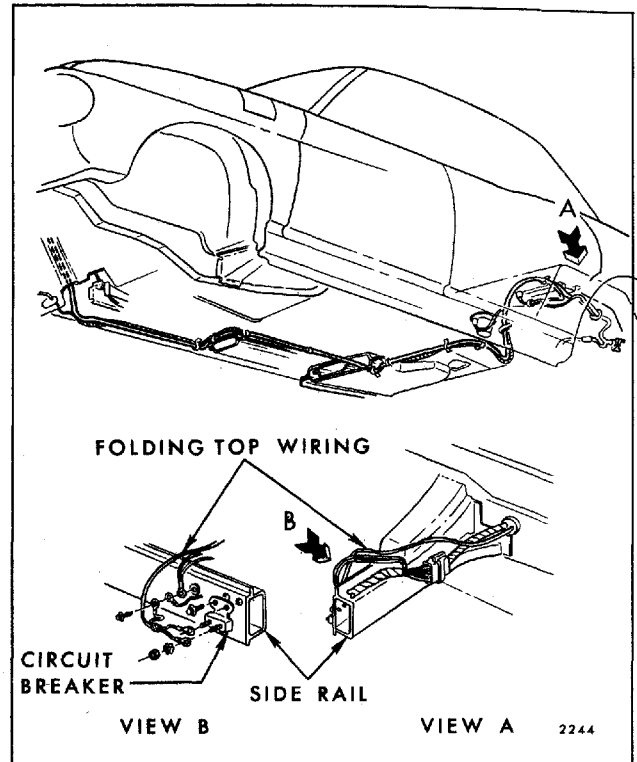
Electric Folding Top Body Wiring - Corvair
